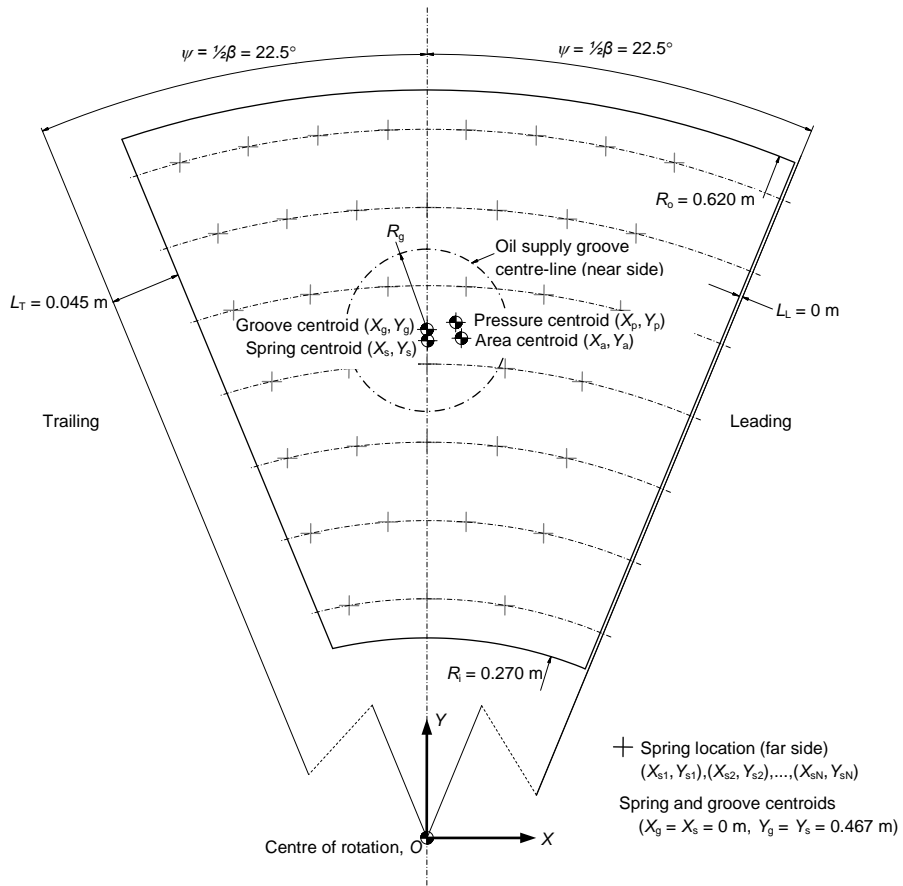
Plan view of the truncated sector pad, showing nominal spring positions and groove location.
